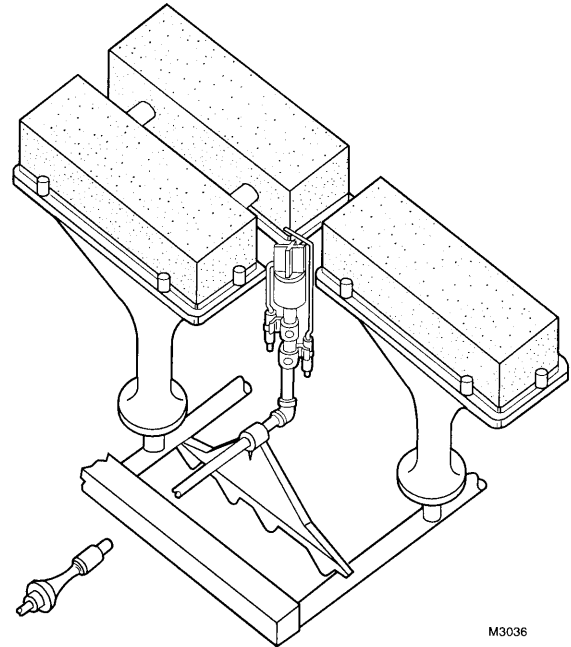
Typical mounting of gas pilot and flame rod assembly on multiple head gas burner.
